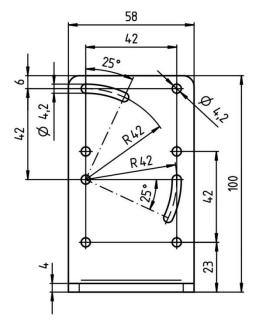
Dimension drawing BE 901 FA-001 mounting device (all dimensions in mm)
